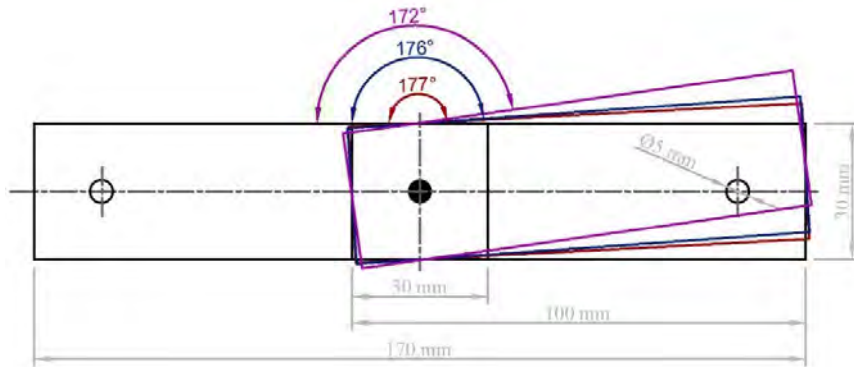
Tensile-shear angular misalignment deviation sample geometry drawing.
